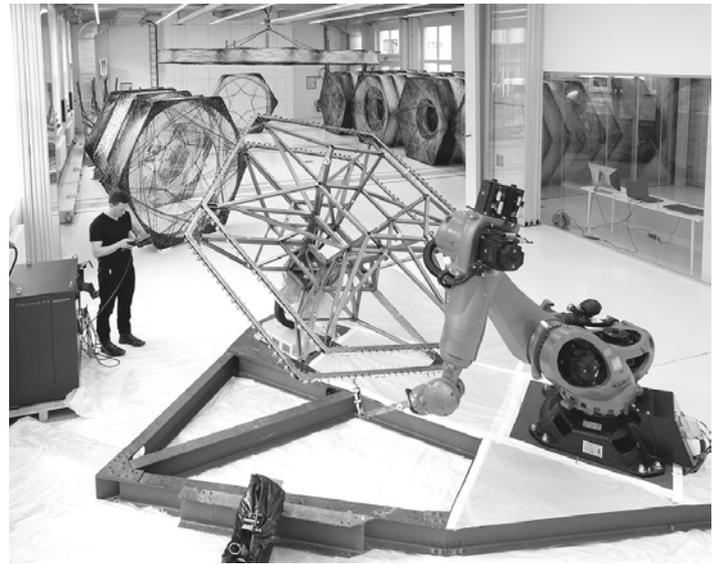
hexagonal winding tool in the center and robotic arm before fabrication (Victoria and Albert Museum, 2016)
